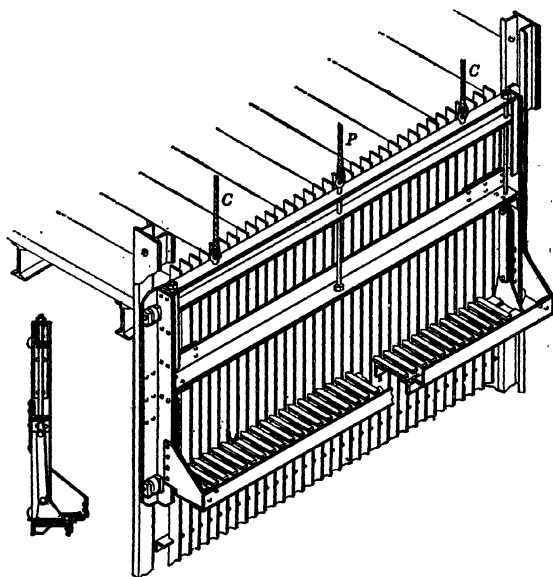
Mechanical Rake. Newport News Shipbuilding and Drydock Co.
